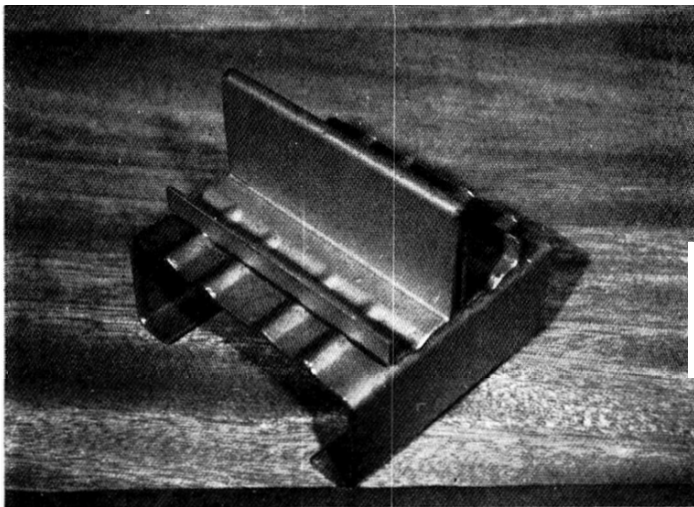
RIDGE WELDING OF COLD-ROLLED SECTIONS
